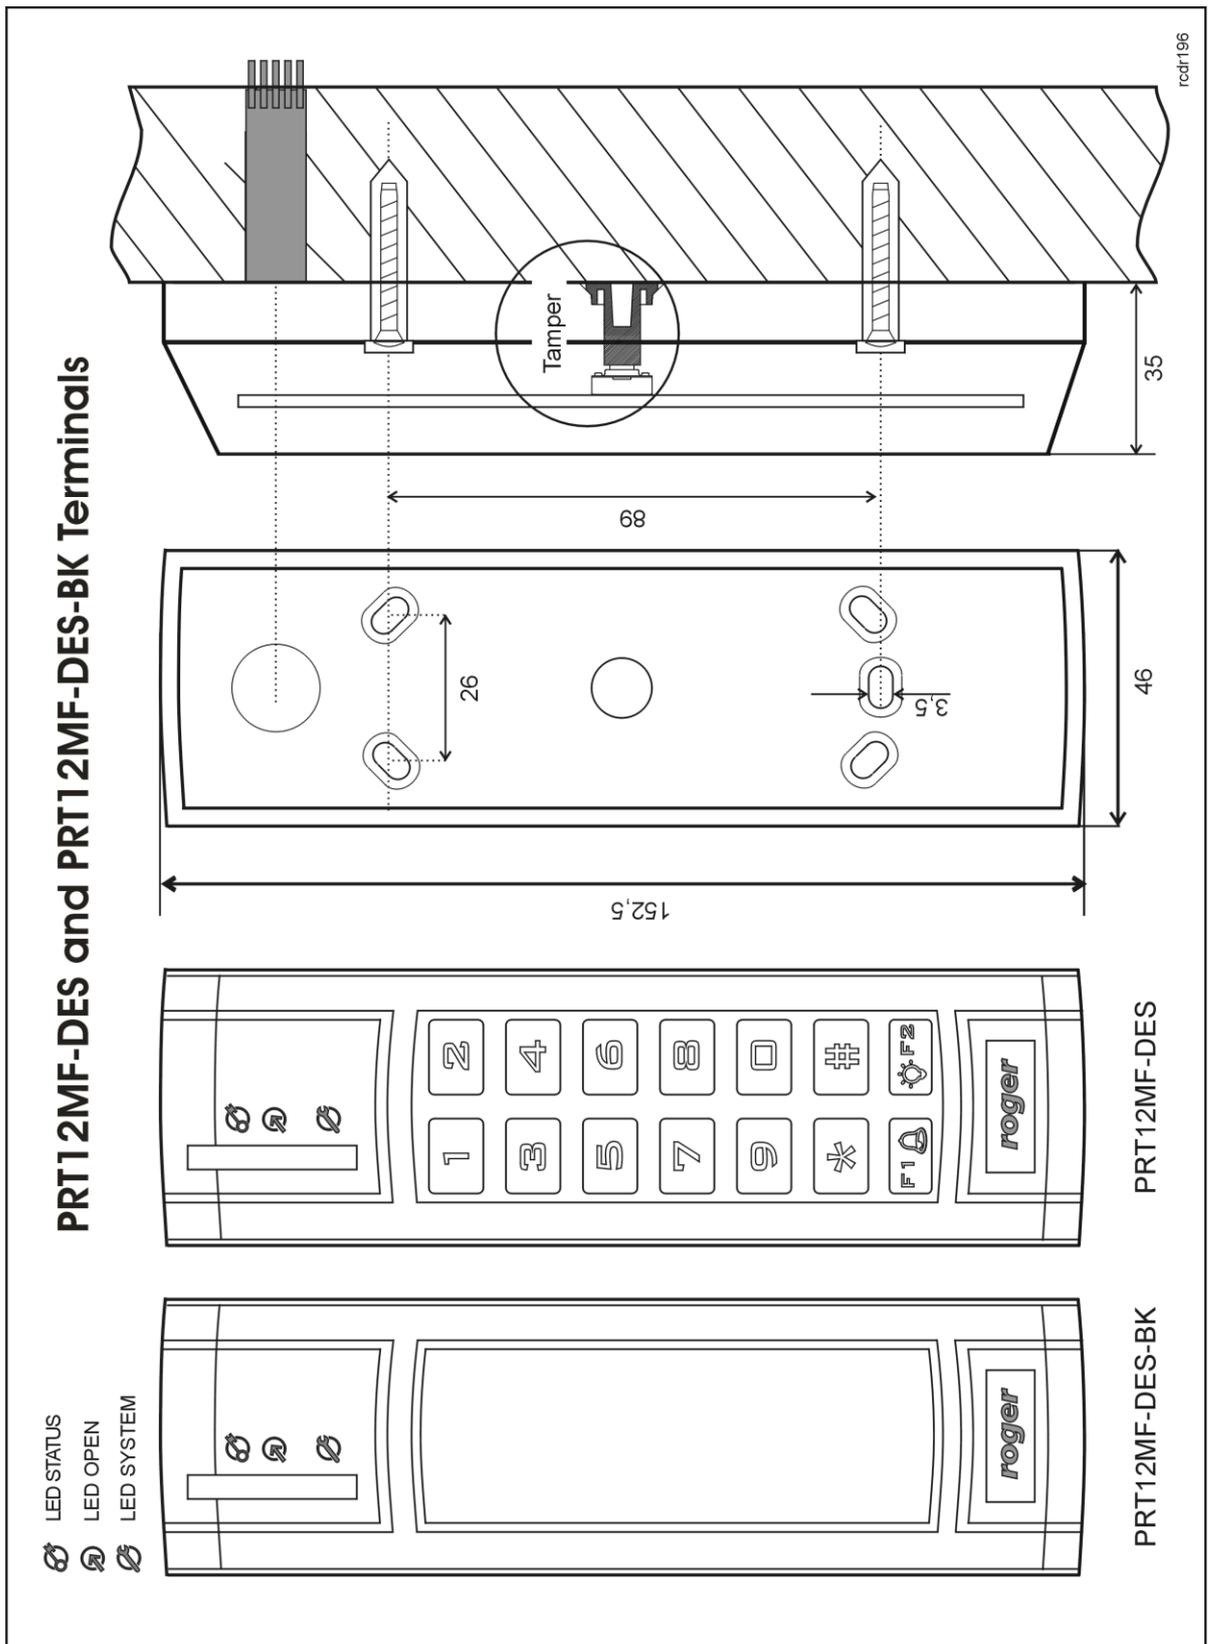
Dimensions and tamper details, standard (high profile) bottom enclosure
